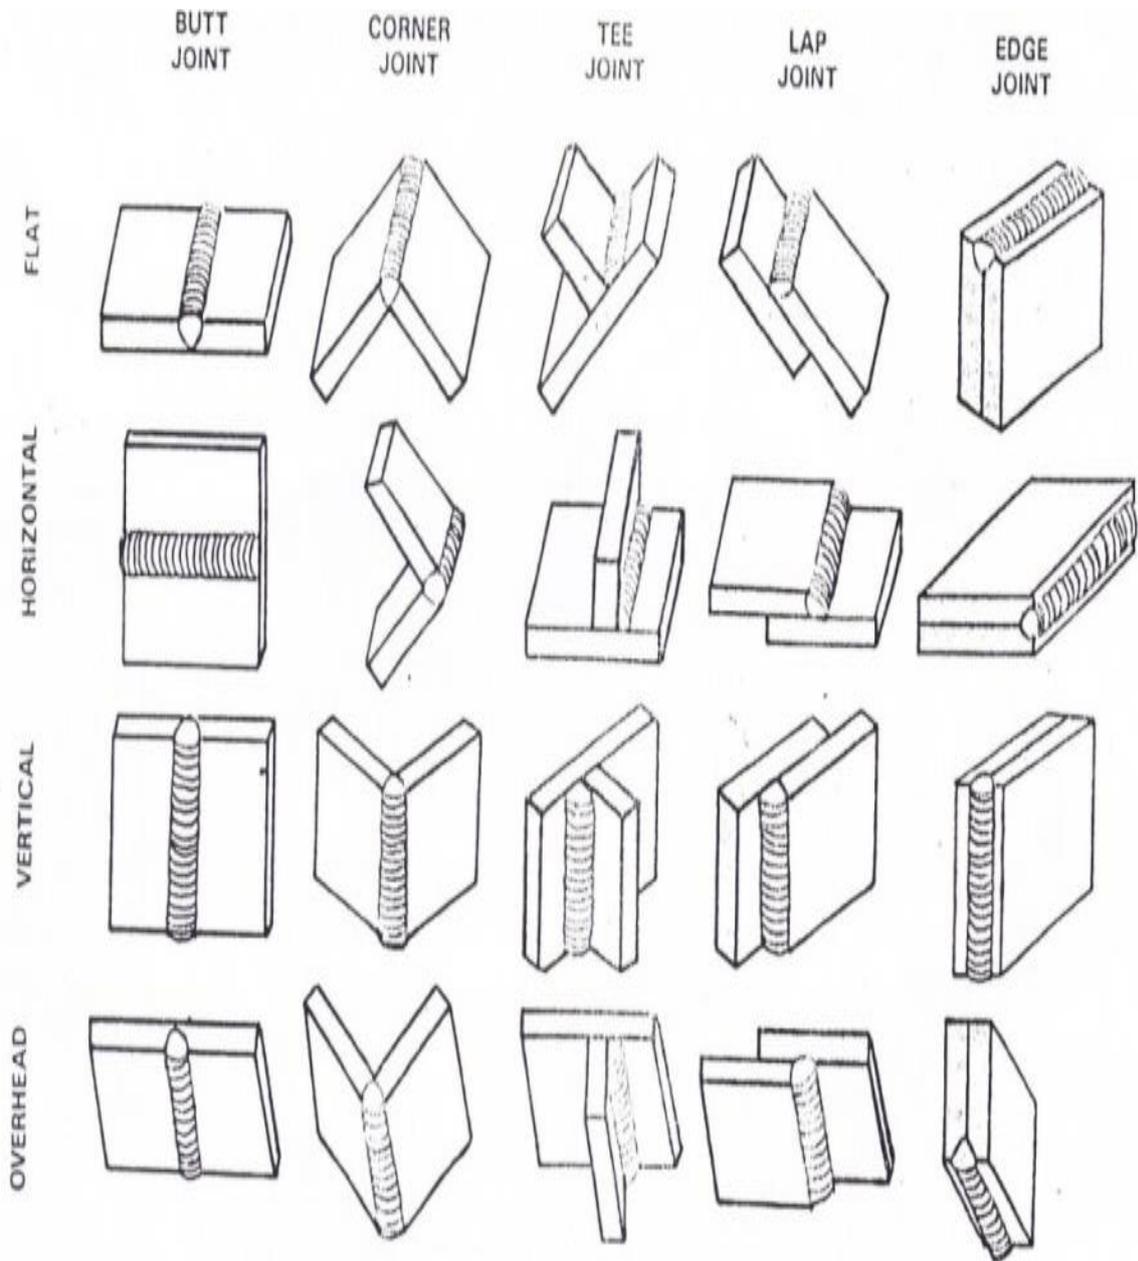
The five basic weld types may be made in four different welding positions.
